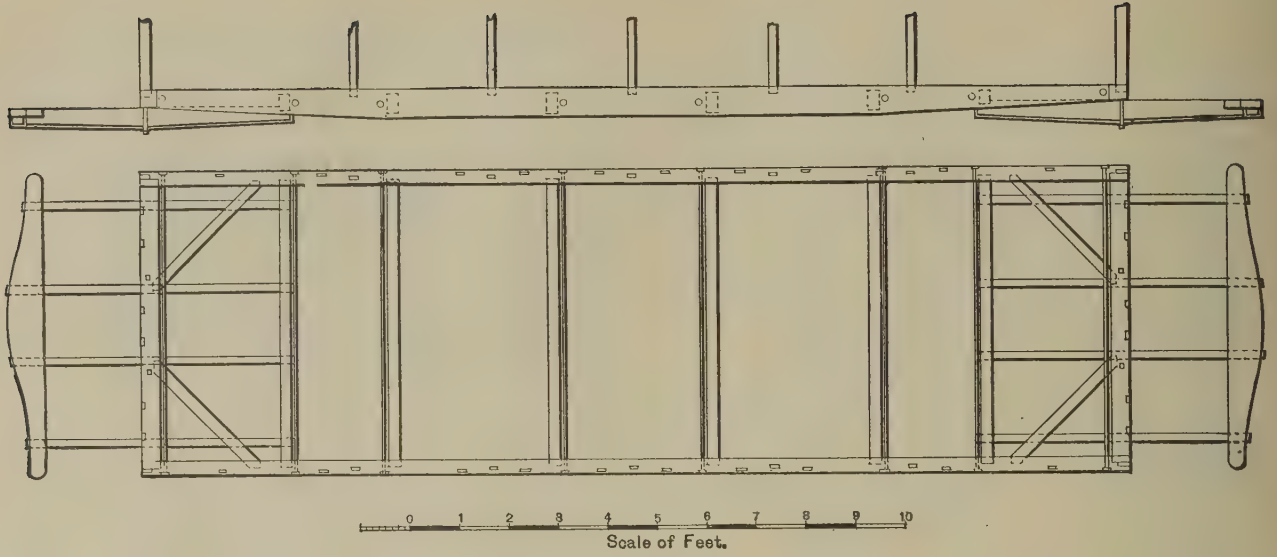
THIRTY-FIVE PASSENGER OPEN CAR—LEWIS & FOWLER MANUFACTURING CO.
